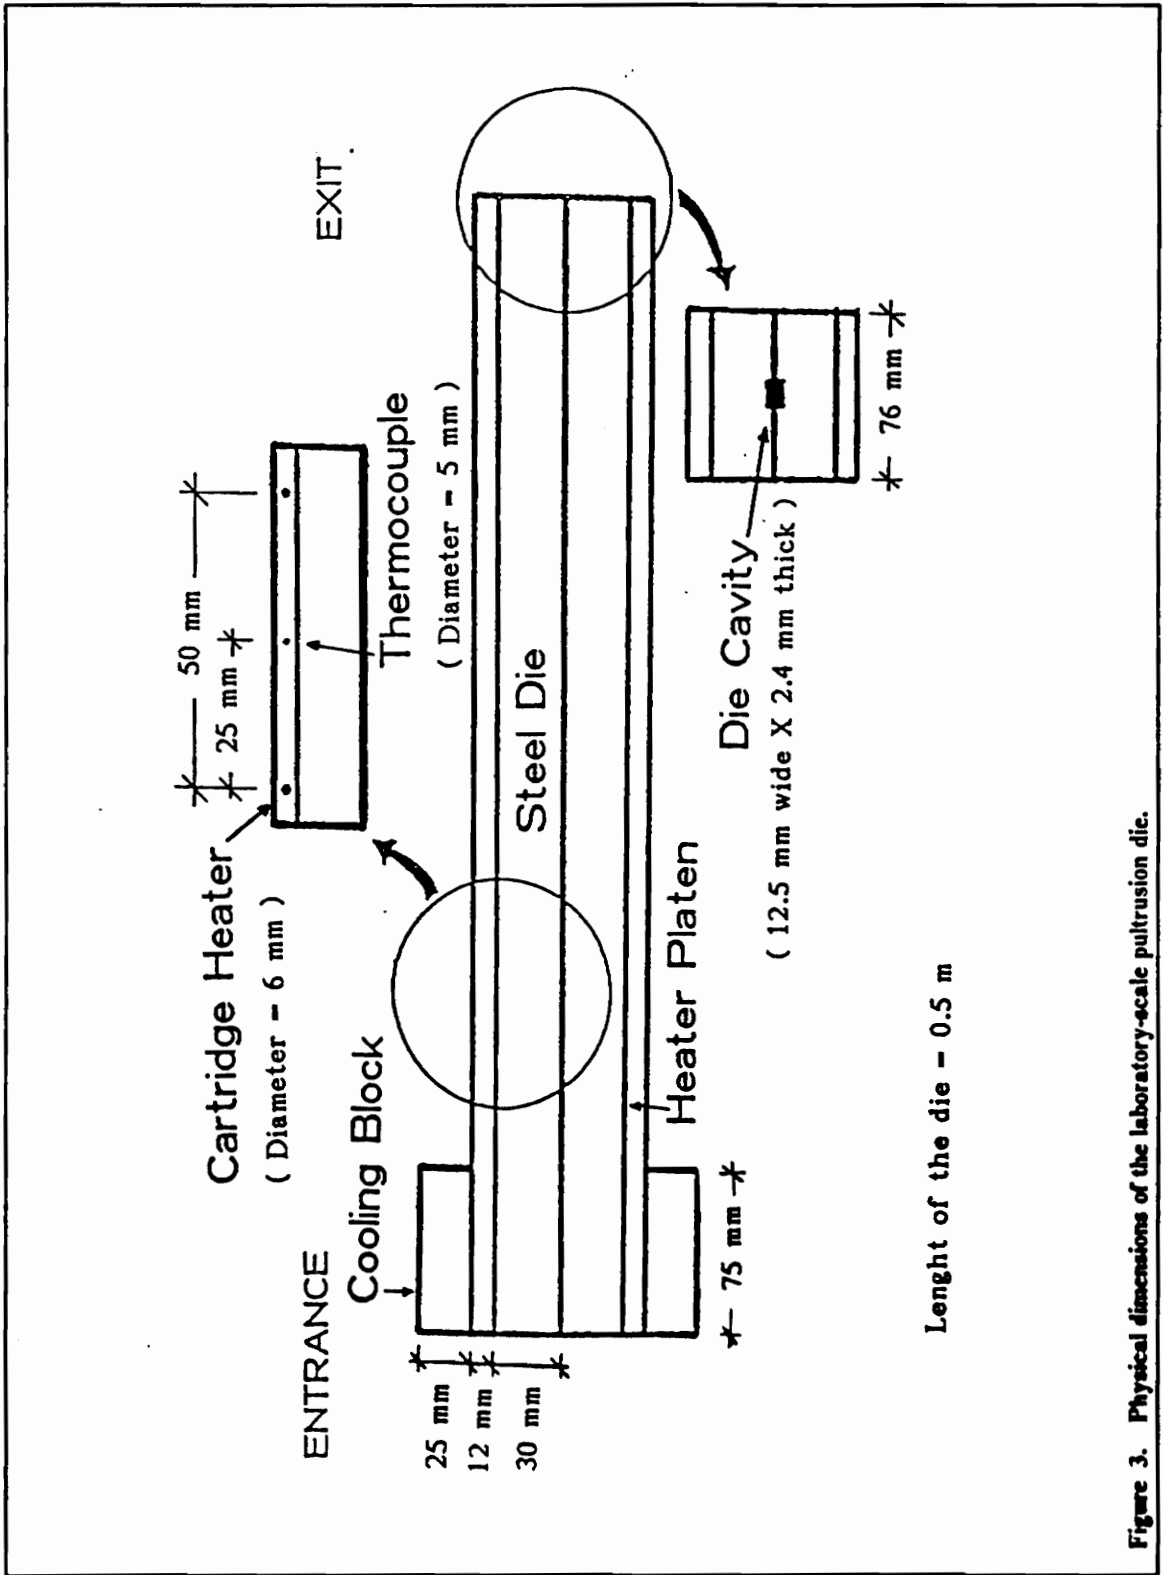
Physical dimensions of the laboratory-scale pultrusion die.
